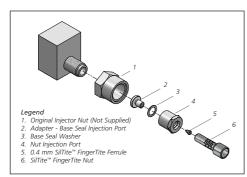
Exploded diagram of the SilTite™ FingerTite Injection Port assembly.
